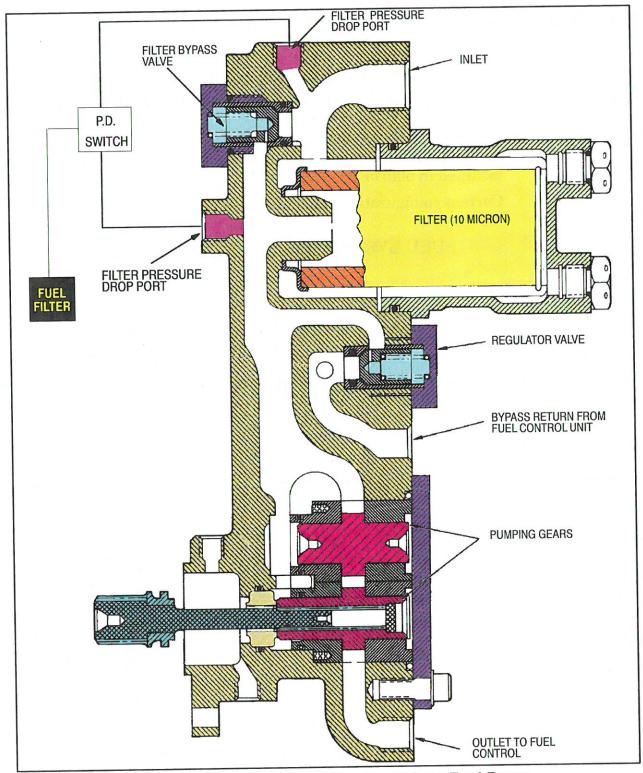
Single Element Engine–Driven Fuel Pump (Rolls Royce 250–C20 Series Only)
